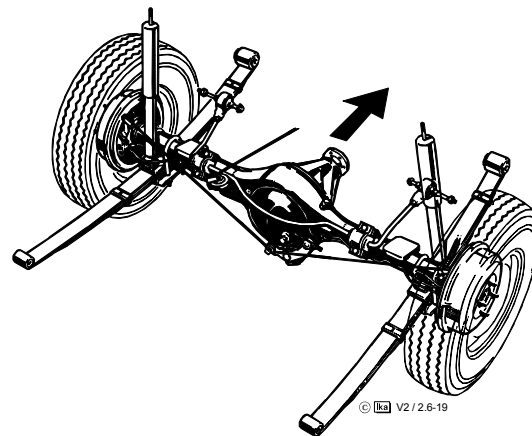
Automobile rear axle guided by leaf springs (Ford Capri)
